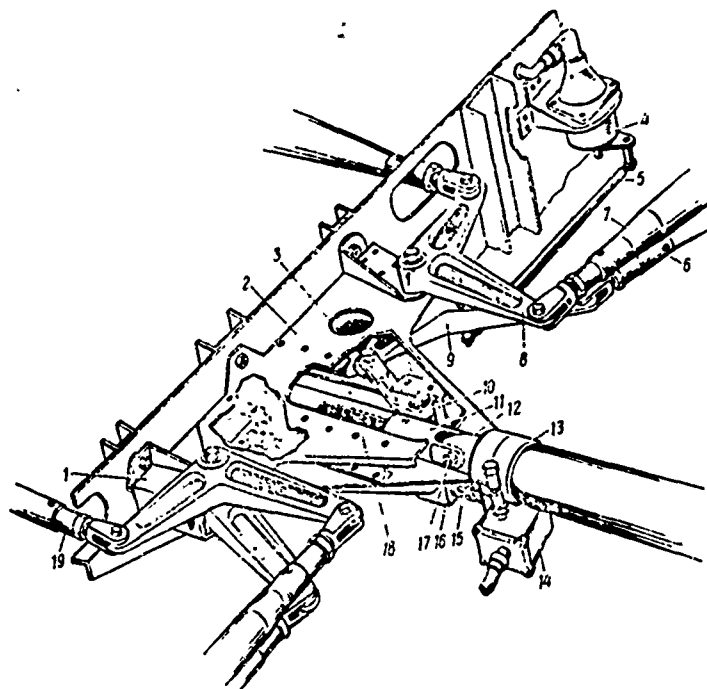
The UZ-1A electrical mechanism of the upper wing flap control: 1 - bracket; 2 - box of the mechanism; 3 - guide; 4 - sensor of the flap deflection indicator; 5 - rod of sensor; 6 - flap control rod; 7 - aileron control rod; 8 - aileron control actuator; 9 - flap control actuator; 10 - ball bearing of slider; 11 - slider; 12 - rod of electrical mechanism; 13 - yoke; 14 - rear end switch; 15 - adjustable pin of end switch; 16 - adjustable stop; 17 - bolt; 18 - guide section; 19 - aileron control rod.
